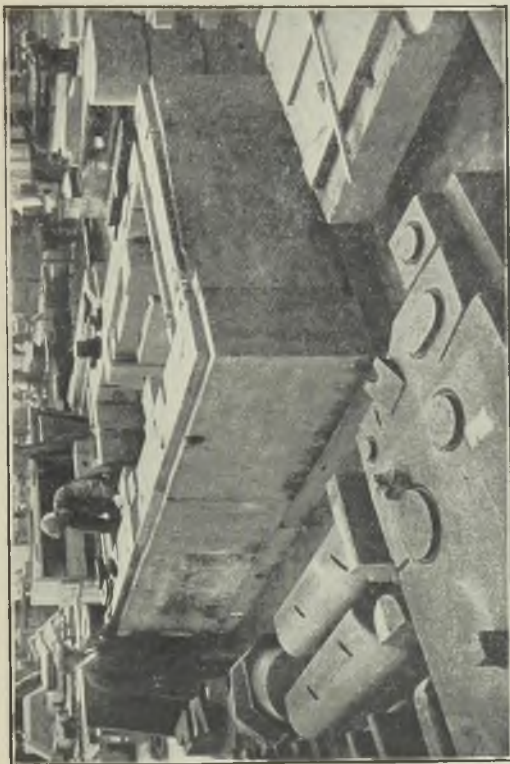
MOULD FOR LARGE MARINE GEAR-CASE CASTING—ALL-COIL METHOD.
